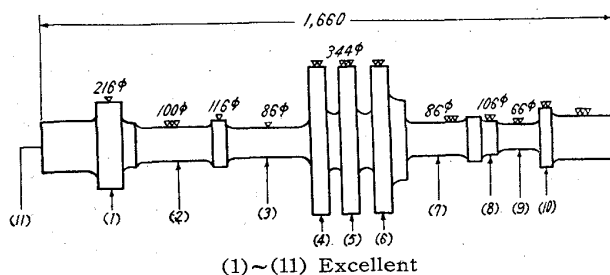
Approximate dimension of the rotor shaft and the results of super sonic inspection.
